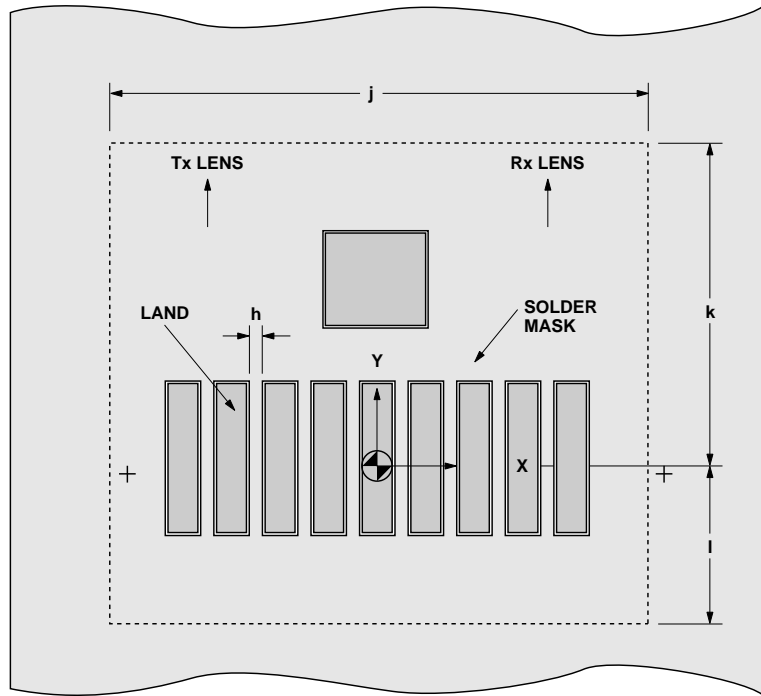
PCBA – Adjacent land keep-out and solder mask.
